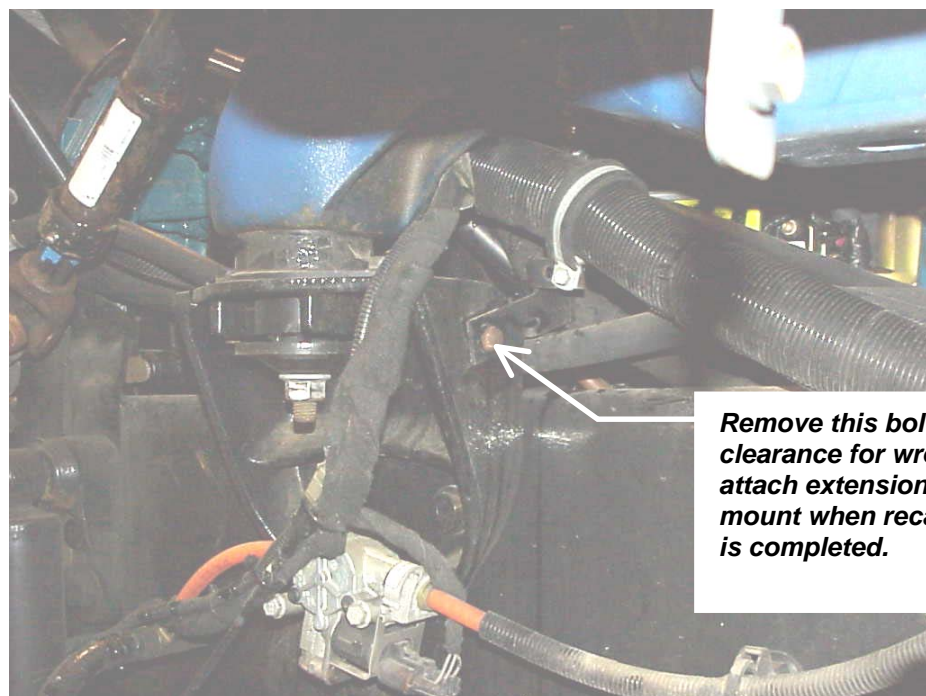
You may need to remove extension clip as indicated for torque wrench clearance. *This is on Mid-Mount Cabs ONLY.
